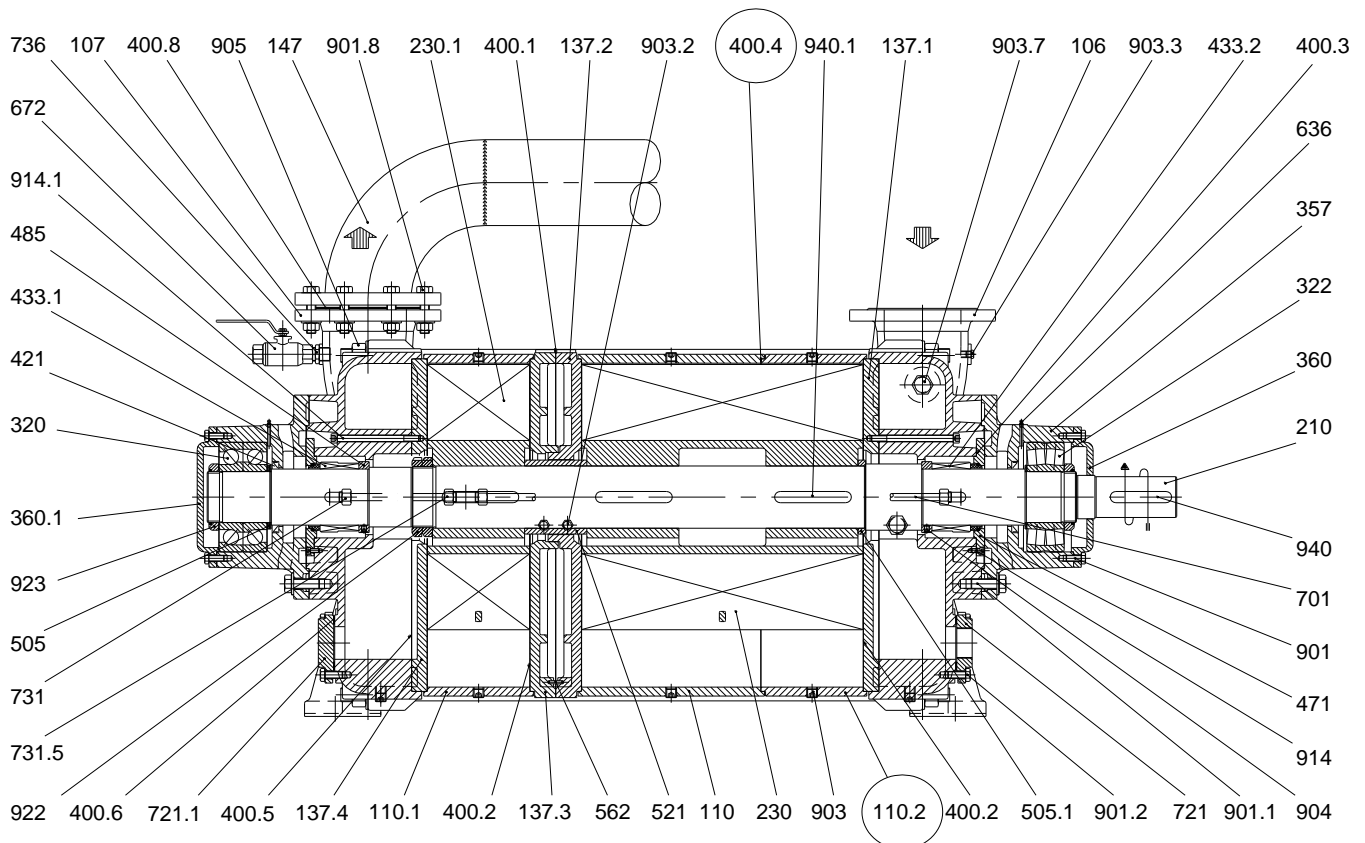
TYPICAL SECTIONAL DRAWING WITH "SINGLE" MECHANICAL SEALS - Series TRHA 150
